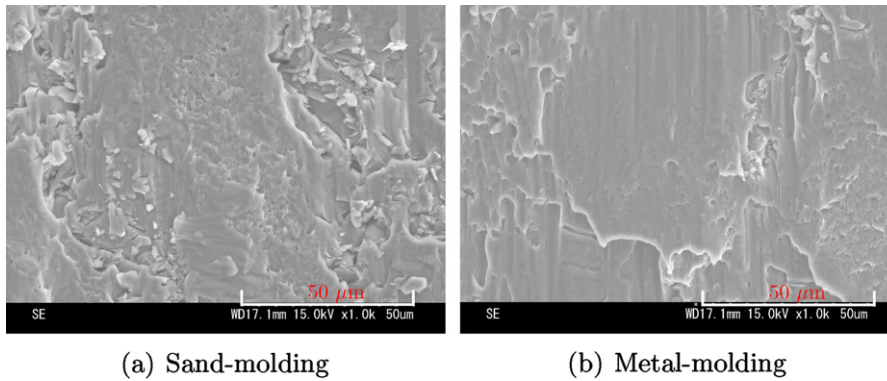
Fractographs of the simple shear tests on the butterfly specimens.
